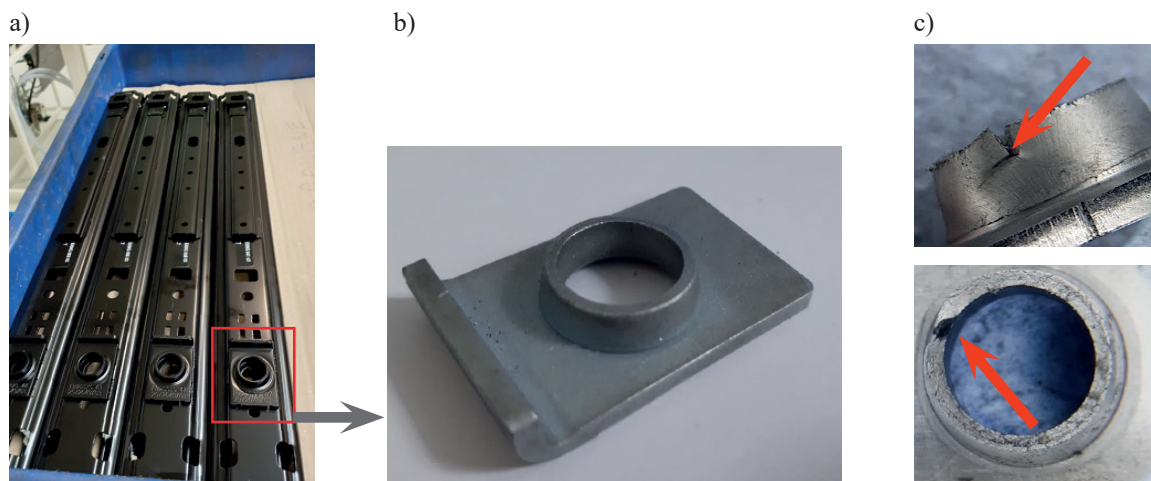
Flanged component: a) as part of the car seat guide; b) separated workpiece; c) cracks on workpiece flange
